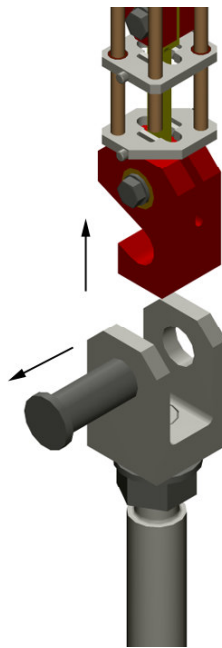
Specimen removal process by sliding out the lower linkage pin
